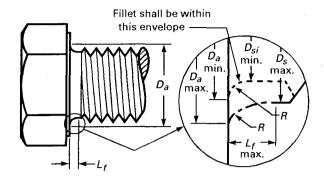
FILLET DETAIL FOR SHORT SCREWS
